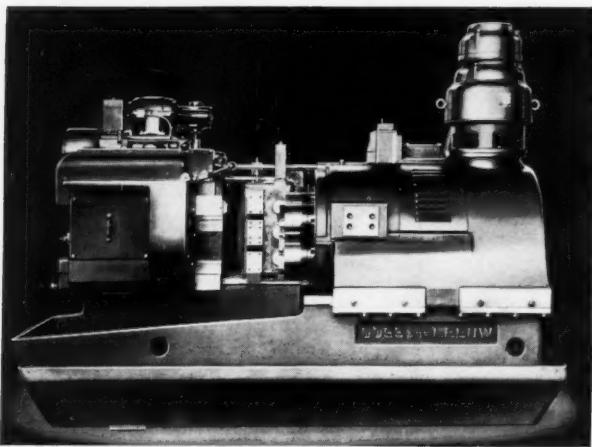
Front view of automatic chucking machine shows the compactness obtained by the use of built-in driving motors
